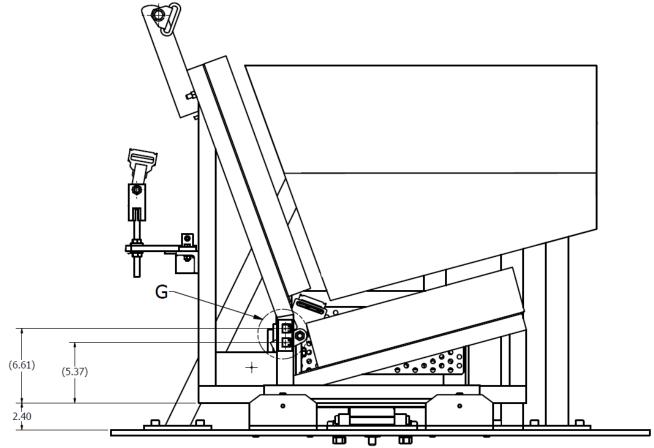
SEAT BENCH ACCELEROMETER MOUNTING LOCATIONS<sup>19</sup> (in.)
